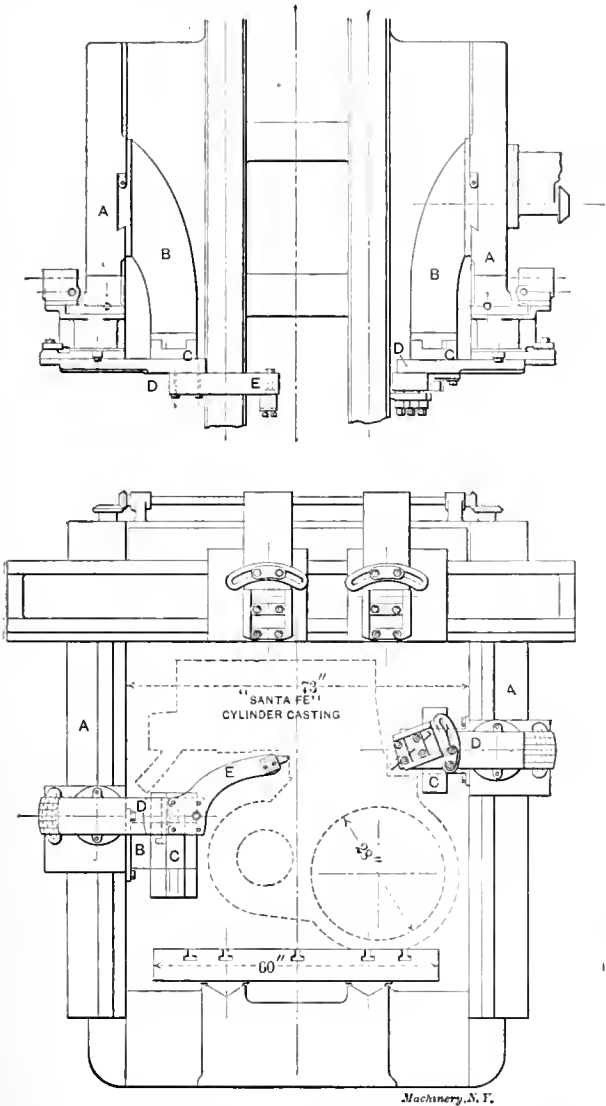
Plan and Elevation of Special Planer Attachments, showing Use on a Difficult Job.
